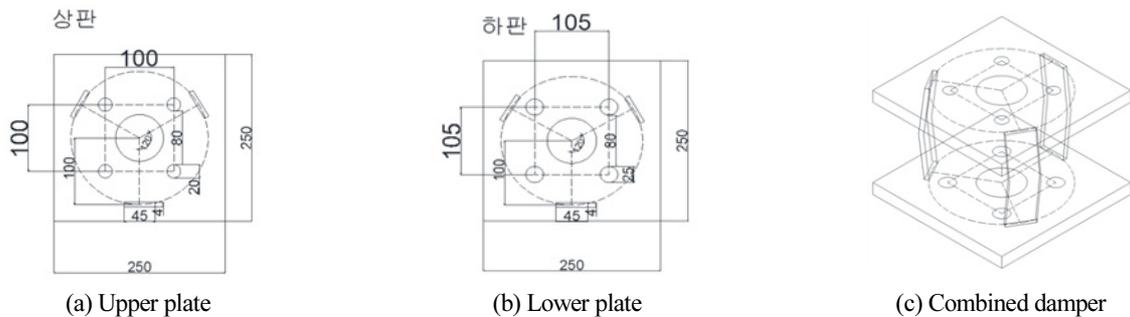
Dimension of steel plate and combined specimen (Damper)
